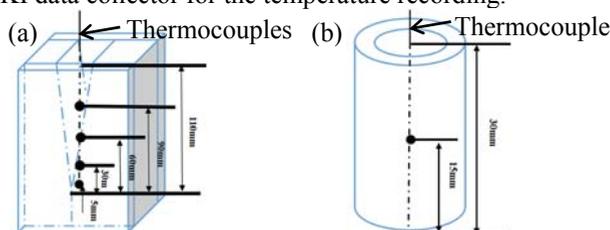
Diagram of casting molds with the locations of thermocouples: (a) Water-cooled copper mold, (b) Graphite mold and refractory mold.
